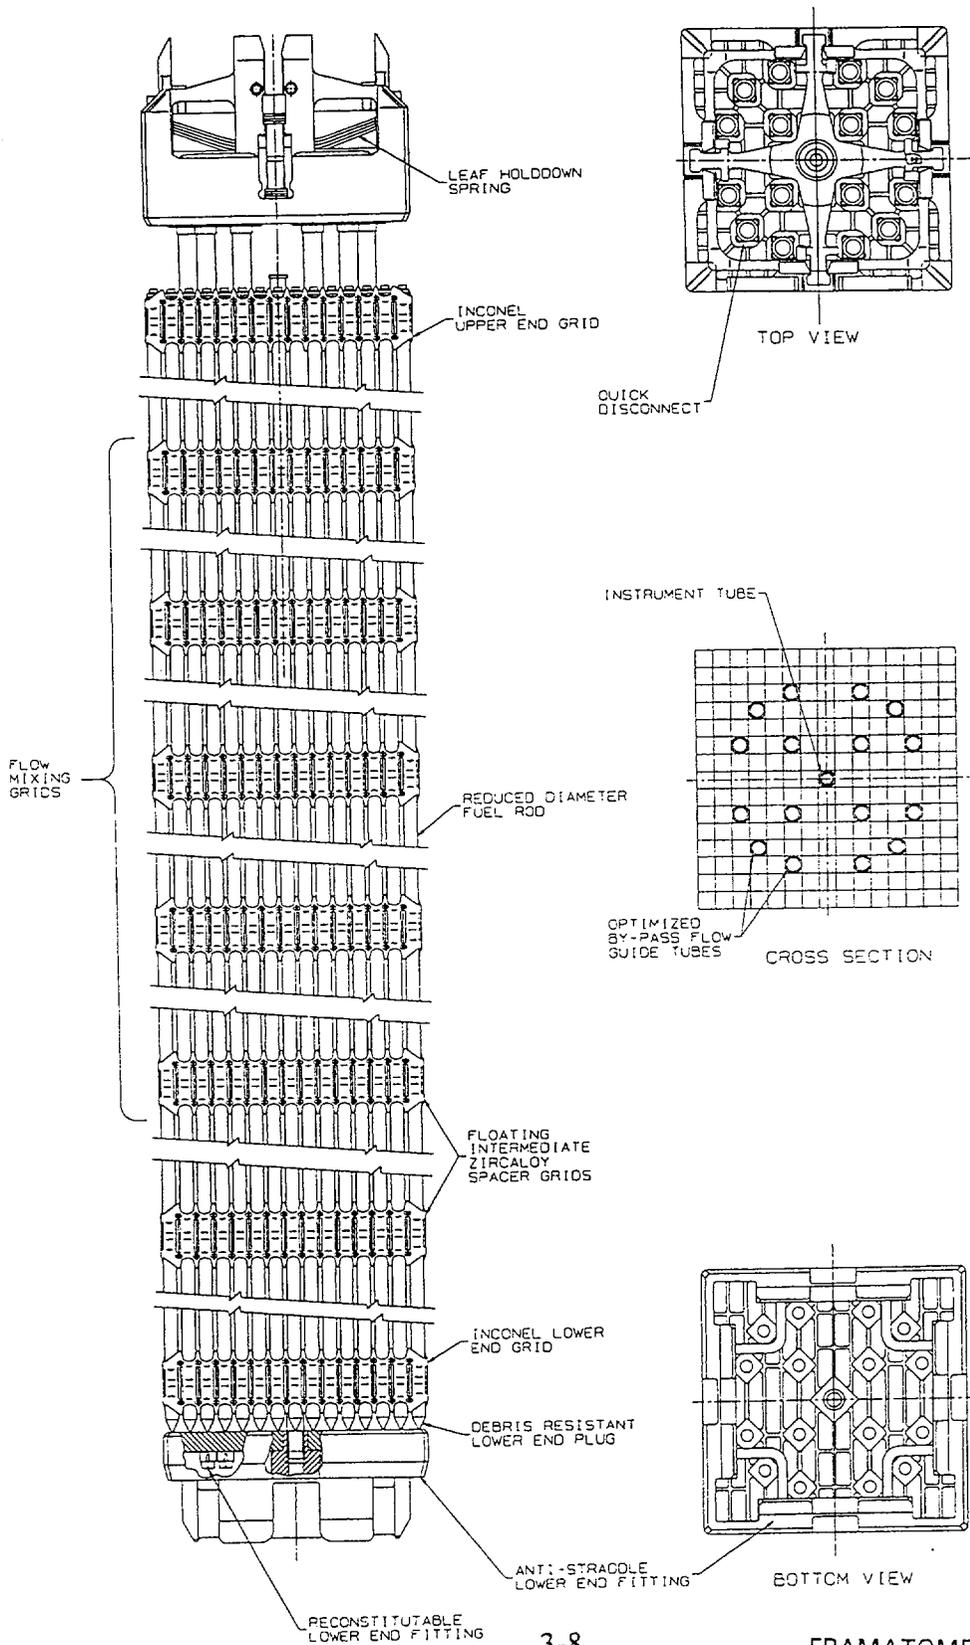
Mark-B11 Fuel Rod Assembly
